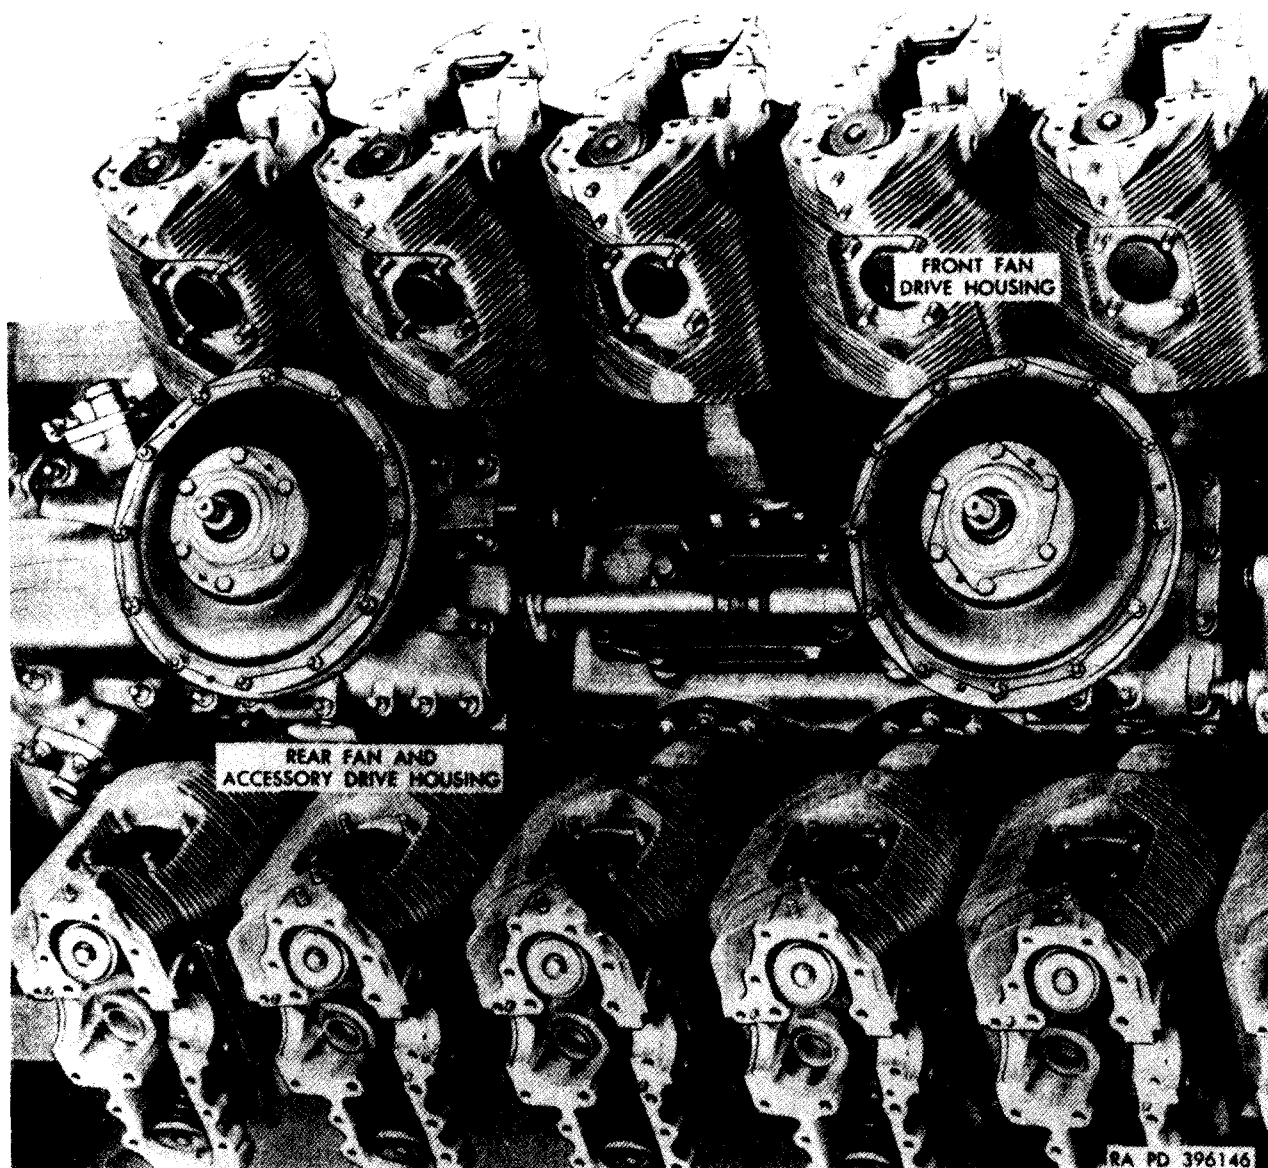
Engine with cylinders, front fan drive housing, and rear fan and accessory drive housing assemblies installed.
